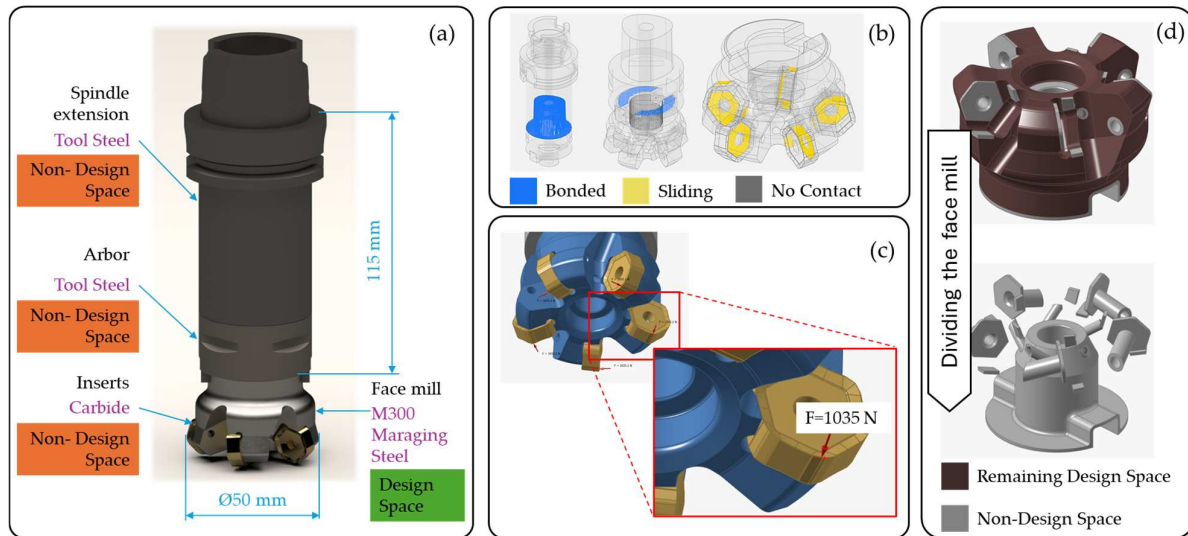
(a) Face mill assembly with component names, dimensions and materials, (b) contacts, (c) force boundary conditions, (d) design and non-design spaces of face mill body.
